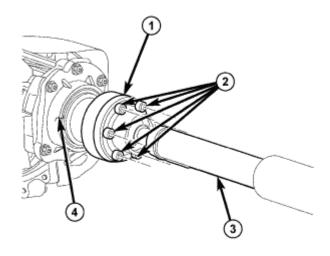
Identifying Propeller Shaft To PTU & Fasteners Courtesy of CHRYSLER LLC
